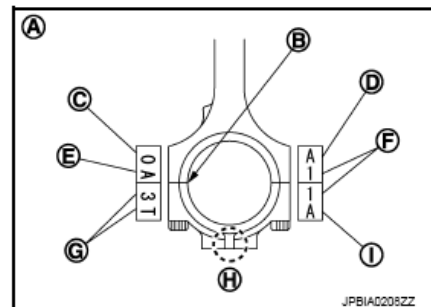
Identifying Diameter Grade, Front Mark And Groove On Connecting Rod Side Face
